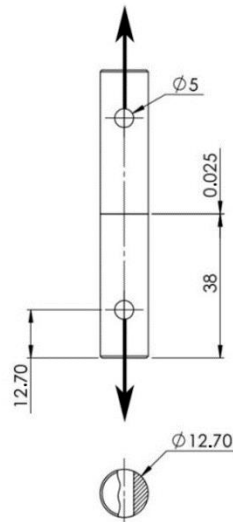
Butt joint geometry with the load direction (dimensions in mm) (ASTM D 2095)
